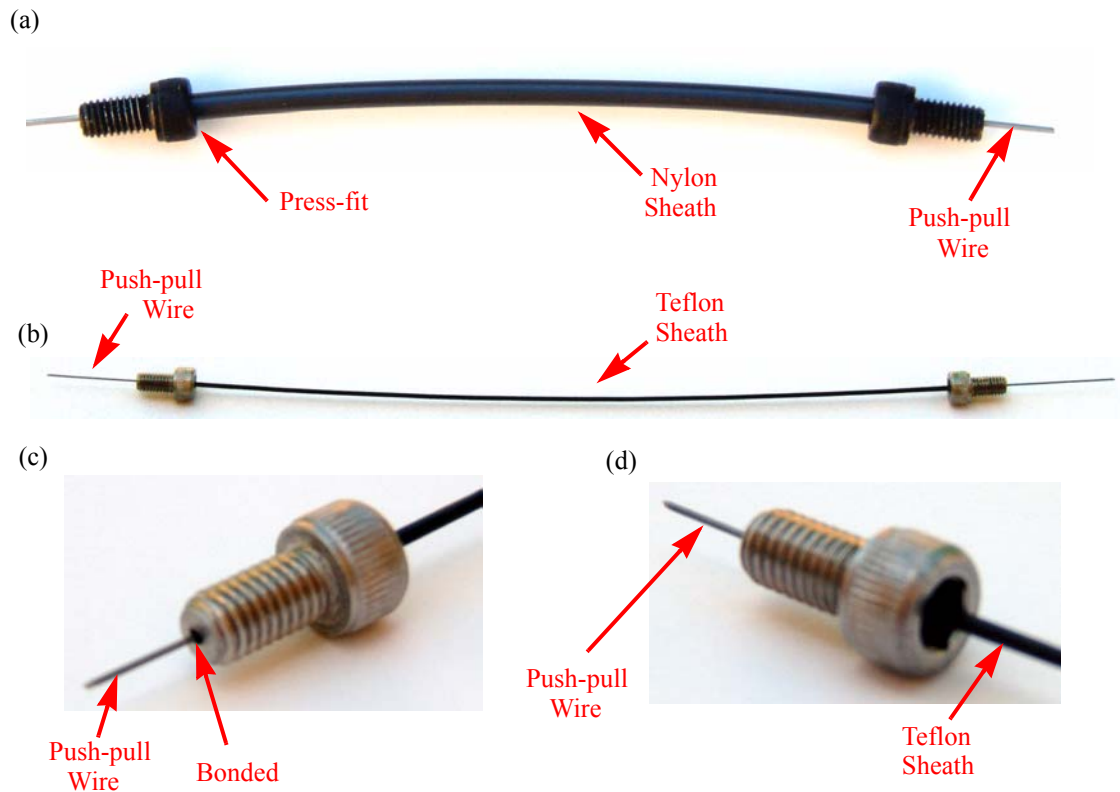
Push-pull wire assembly. (a) Sava push-pull wire assembly. The ends of the nylon sheath are press-fit into center-drilled 10-32 cap screws. (b) Custom designed push-pull wire assembly with teflon sheath. The center-drilled cap screws were bonded to the ends of the Teflon® sheaths. (c) and (d) show a close-up of the sheath bonded into the center-drilled 10-32 cap screws.
